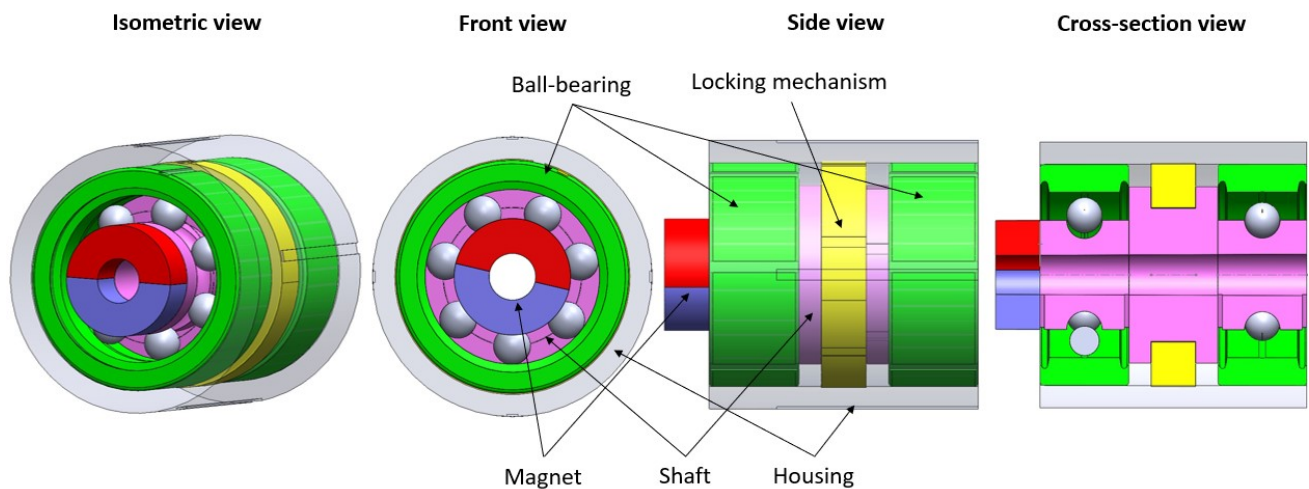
General concept of the end-effector with locking mechanism. The ball-bearings connect the shaft to the outer housing while allowing rotation. The diametrically magnetised actuates the rotation of the shaft while the locking mechanism blocks rotation.
